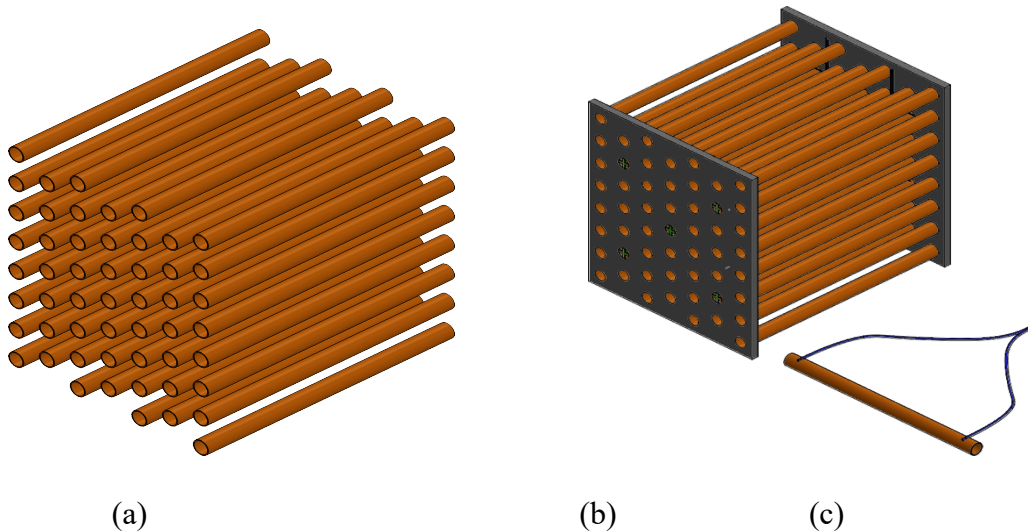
a- The view of the shifted row pipe bundle, b-both sides of the pipes connected with tube-sheets, c- 5 pipes connected with mutual temperature gauges.
